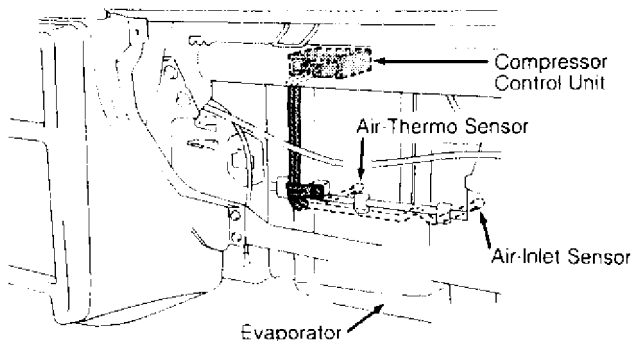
Locating A/C Air Thermo & Air Inlet Sensors
